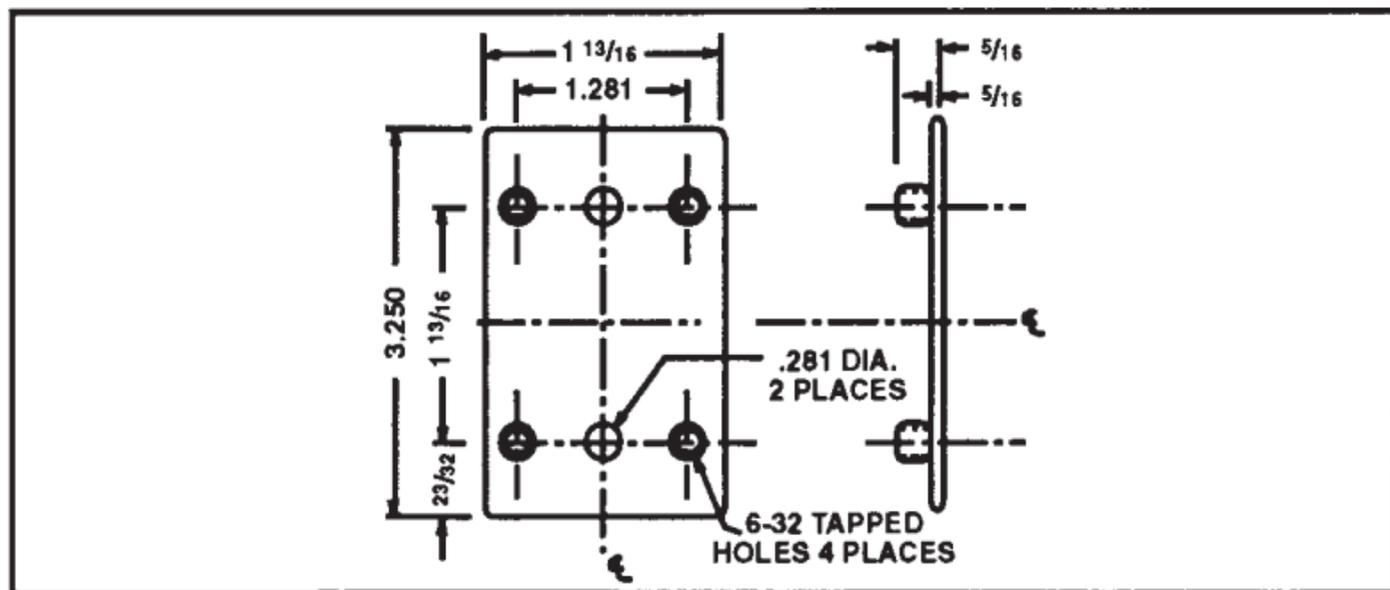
TX90-BR Mounting Bracket (in Inches)
